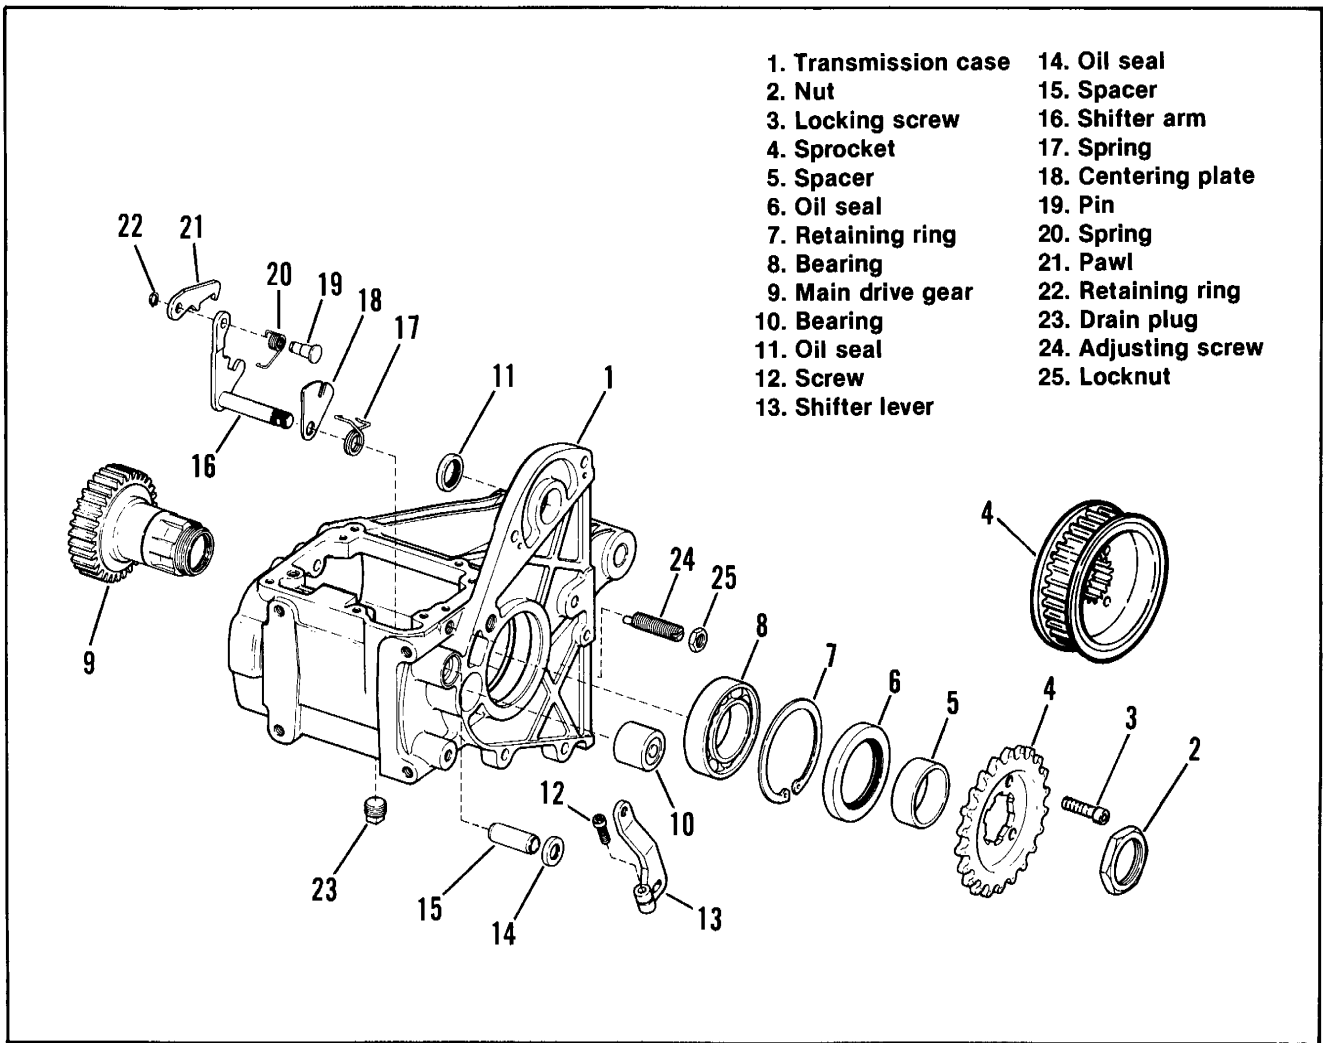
Transmission Case, Sprocket and Main Drive Gear
